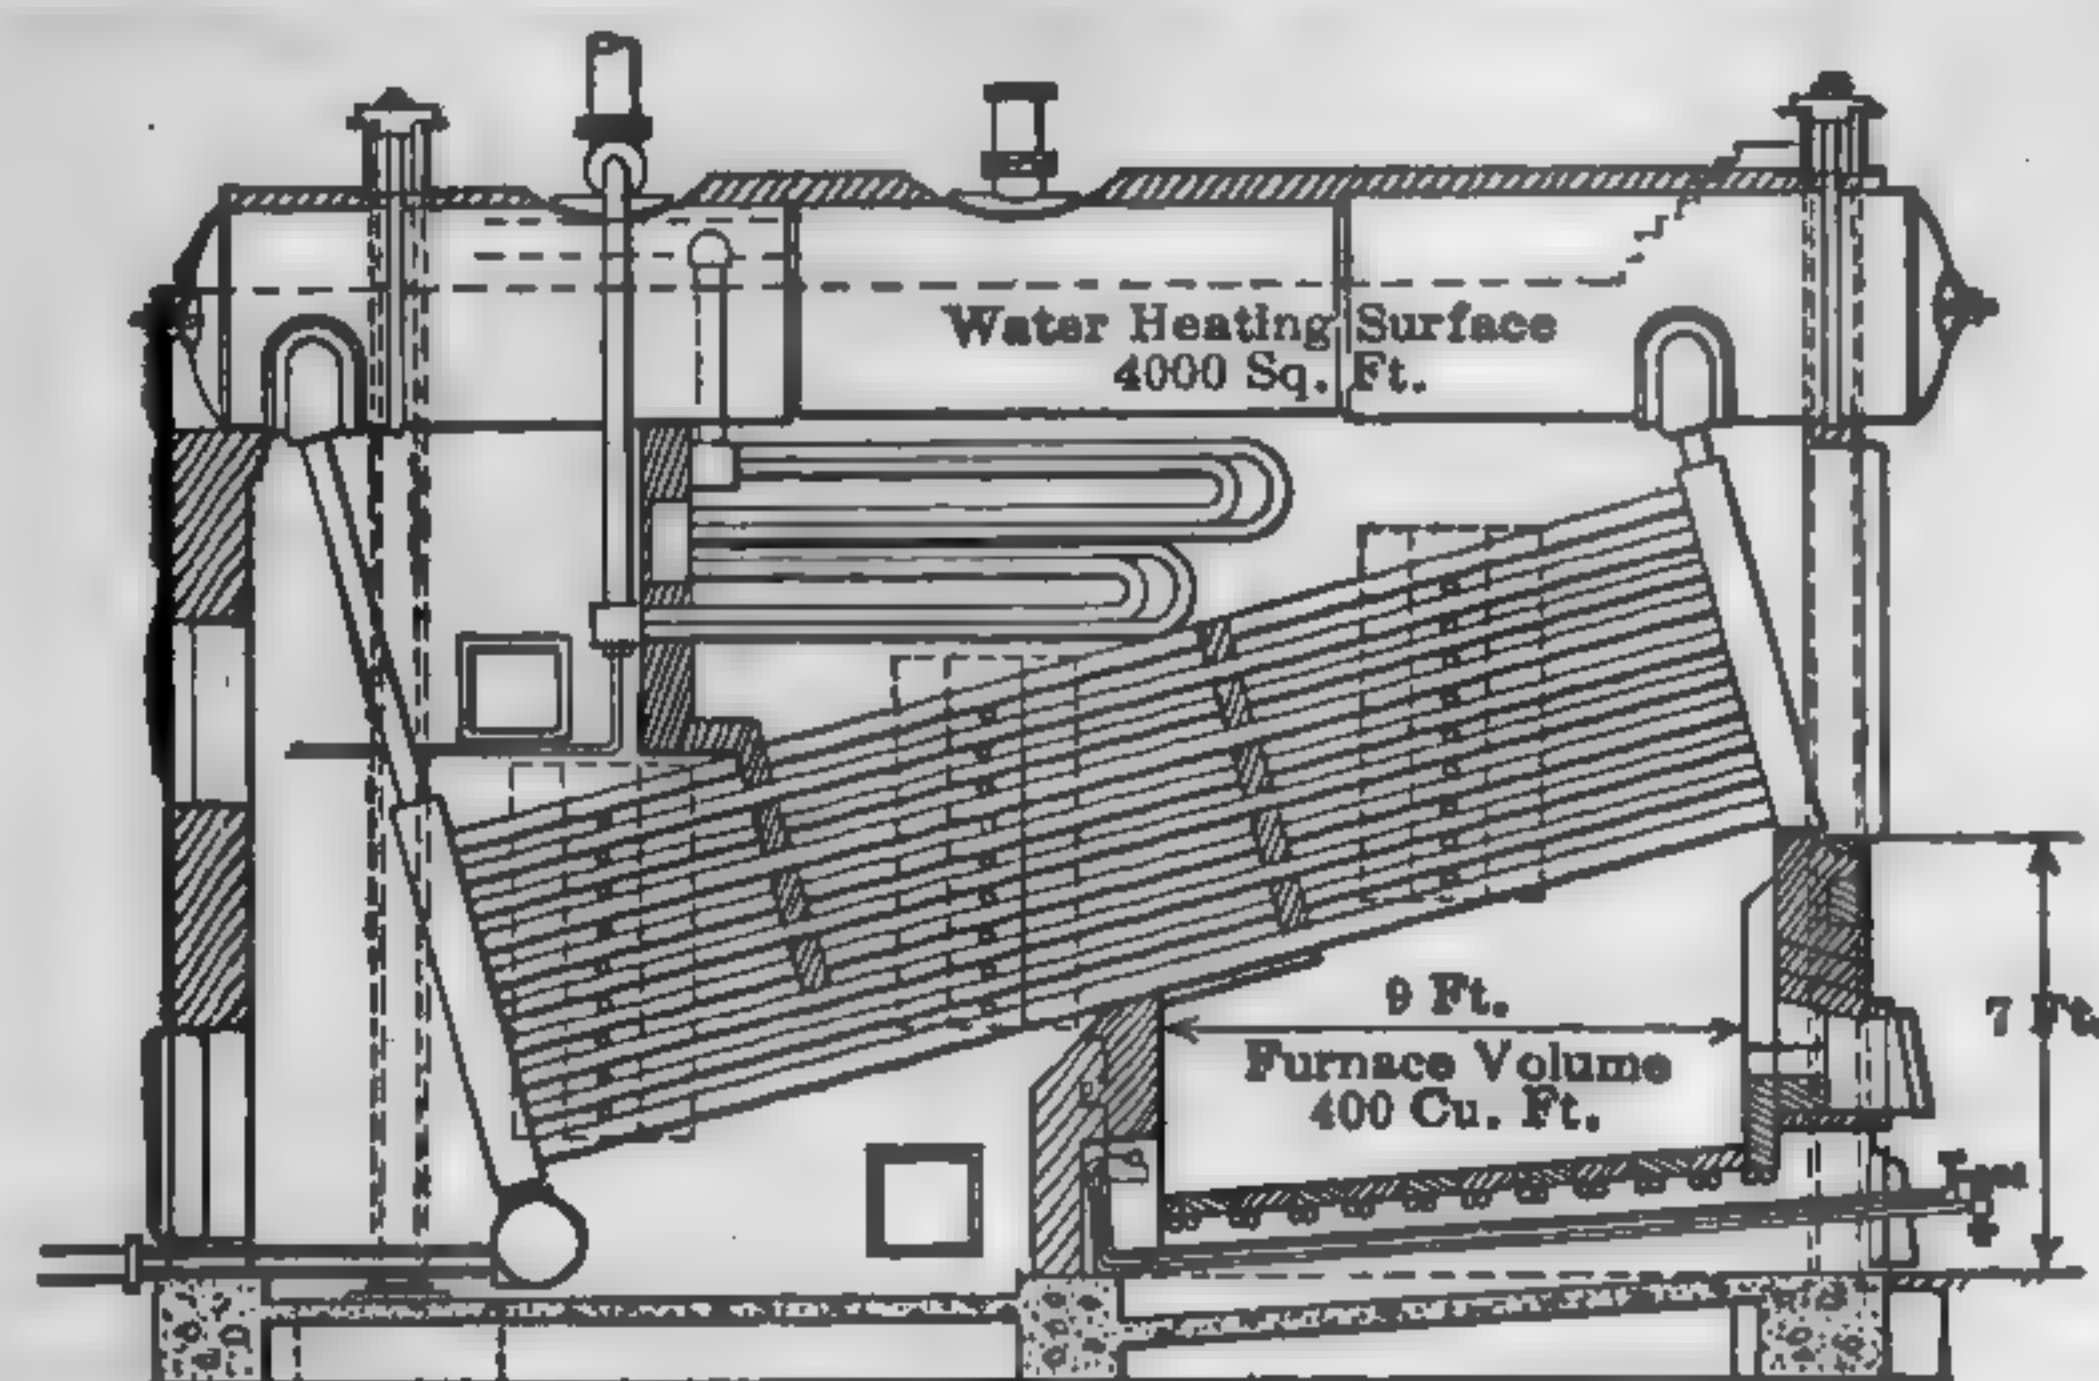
Hammel Oil Burning Furnace — Low Setting, Steam Atomizer.
